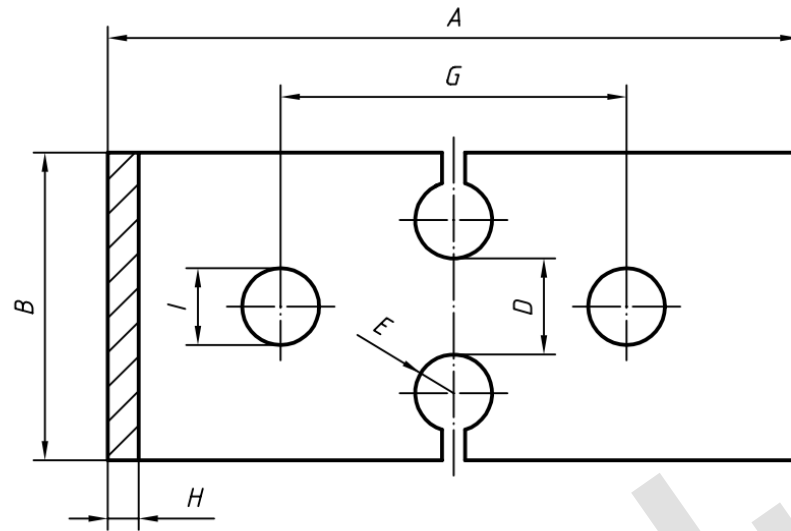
Machined type A tensile test piece (for $e < 25$ mm)
